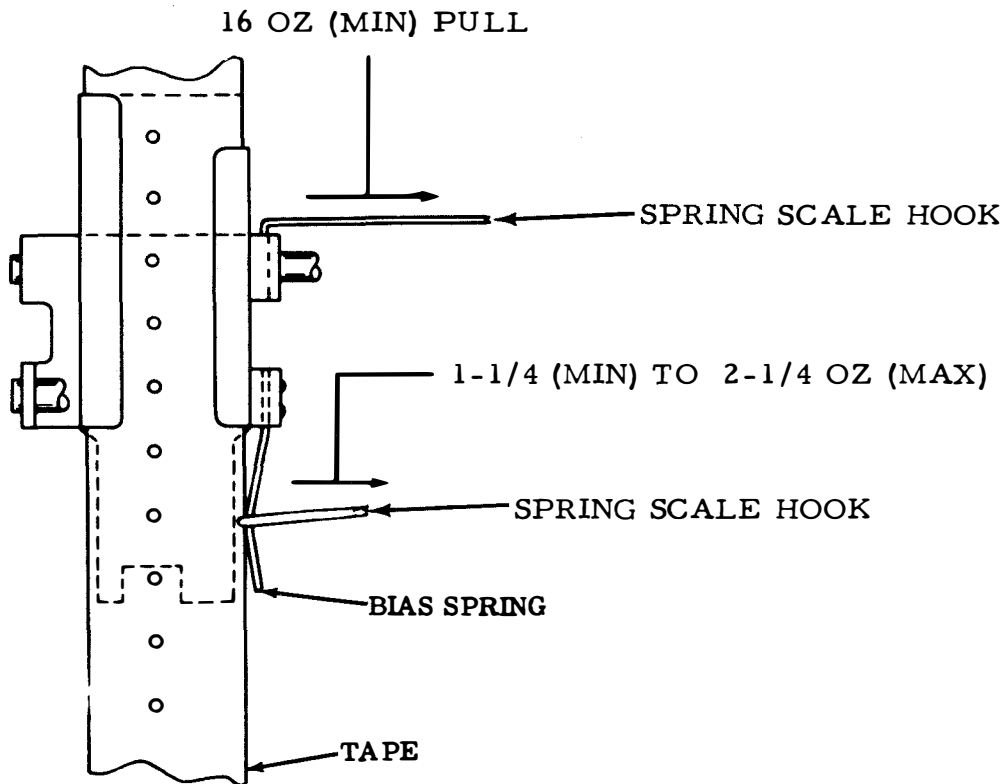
Bias Spring (Tape Chute) and Tape Guide Assembly Spring for Chadless Tape - Top View
